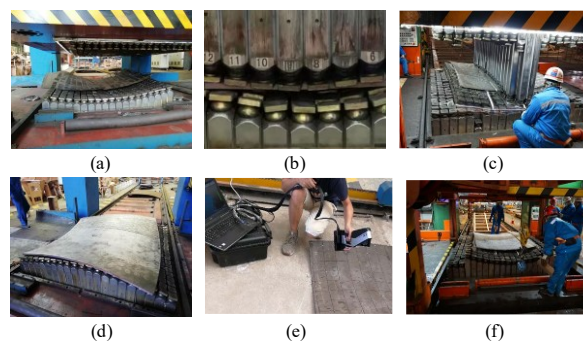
Plate Forming Experiment. (a) Lower Die Shape Adjustment for Saddle-shaped Plate. (b) Before Processing of Saddle-shaped Plate. (c) Processing Compensation for the Other Bending Direction During Saddle-shaped Plate Processing. (d) After Completion of Saddle-shaped Plate Processing. (e) Measurement of Saddle-shaped Plate with Laser Measuring Instrument. (f) Removal of Processed Plate with Lifting Tool.
